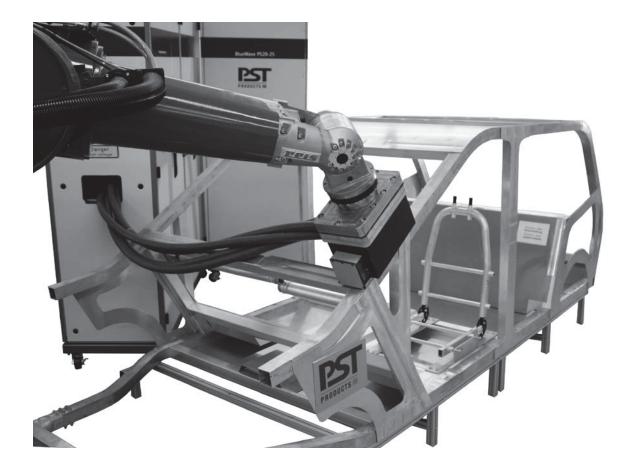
Robotic EMPT sheet welding coil for large assembly manufacturing
